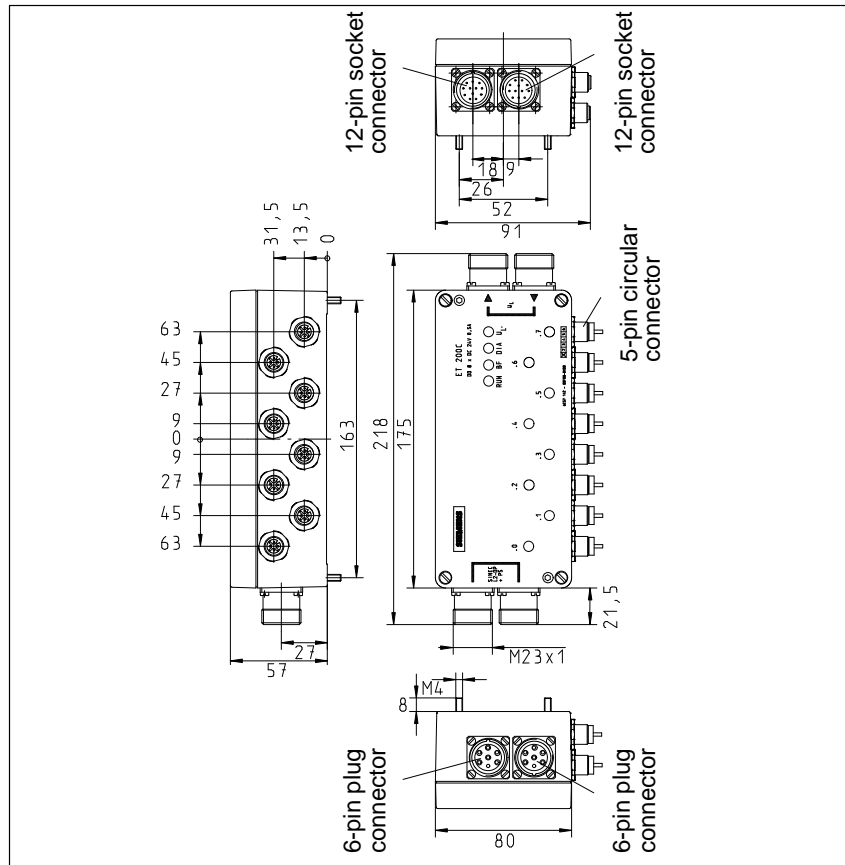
Digital Output Module ET 200C; DO 8 × DC 24 V/0.5A; Dimension Drawing
